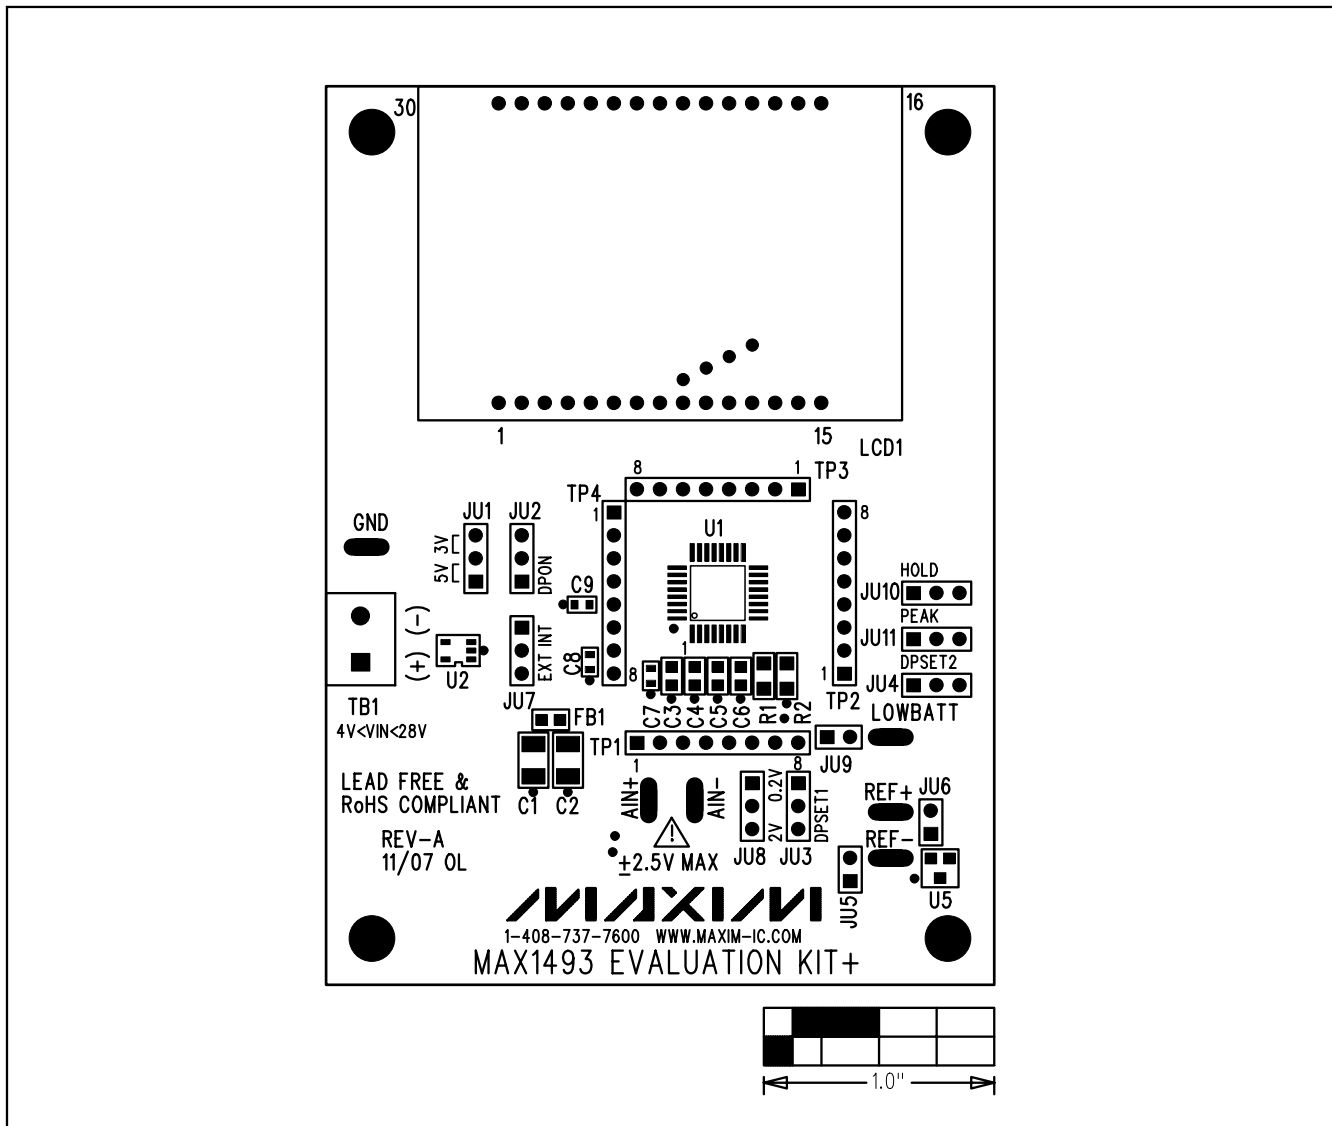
MAX1493 EV Kit Component Placement Guide—Component Side
